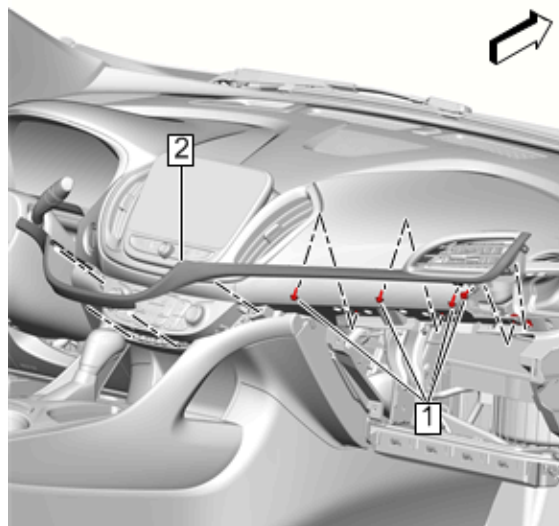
Instrument Panel Trim Plate Applique - Right Side And Bolts
